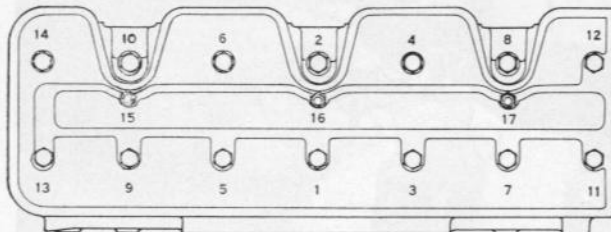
ENGINE CYLINDER HEAD BOLT TIGHTENING SEQUENCE
